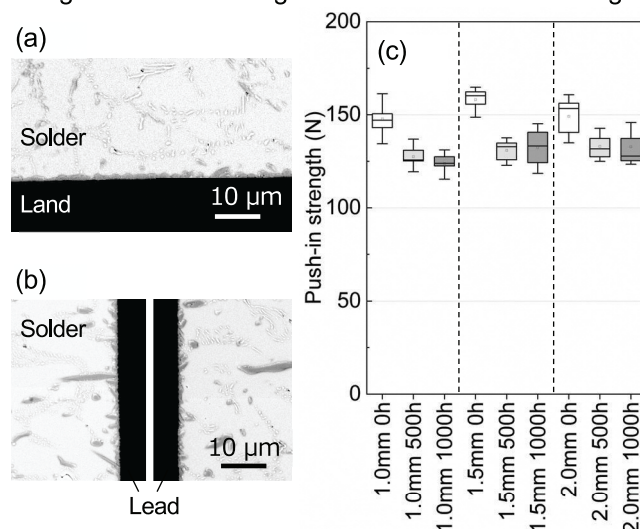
COMPO images of (a) solder-land interface and (b) solder-lead interface and (c) push-in strength of IH soldered leads
